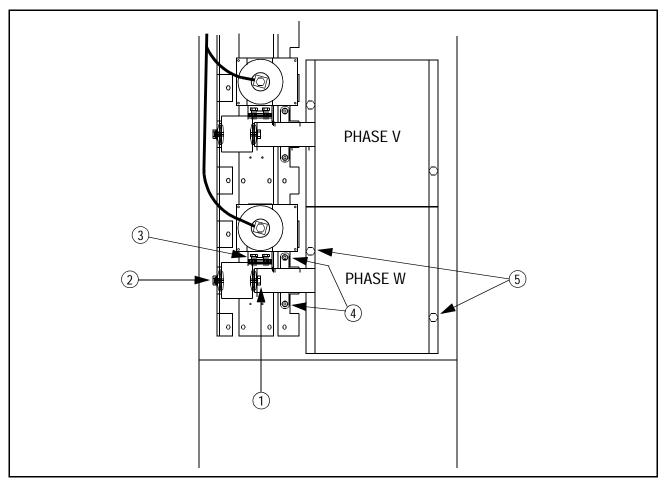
IGBT Module Assembly Mounting Bolt Locations
